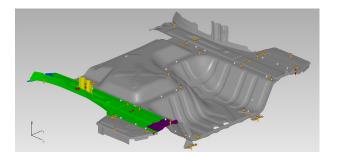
"Subassy 1" from Fig. 3 will be assembled to other parts to form "Subassy2" shown in this picture. The arrows show clamps/locators and the gray spheres welding points.
